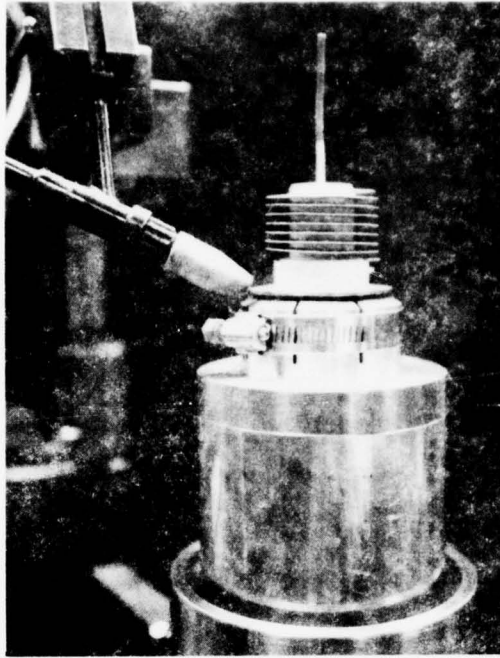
Heliarc Welding Fixture: A device clamped into its welding fixture heat sink is shown. During welding, an arc extends from the torch on the left to the flange. The second weld is made by turning the device over and inserting it into the bottom of the heat sink fixture.
